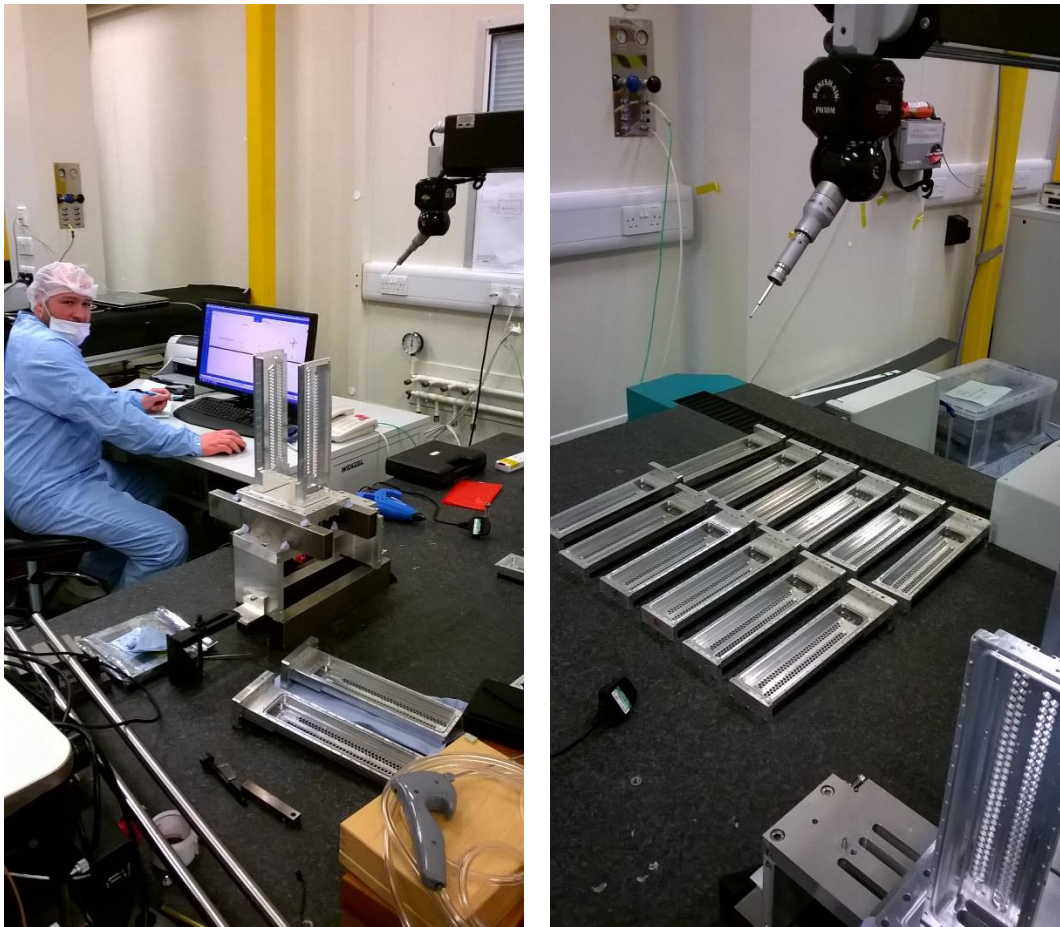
Module manifolds on the Coordinate Measuring Machine at Liverpool.
